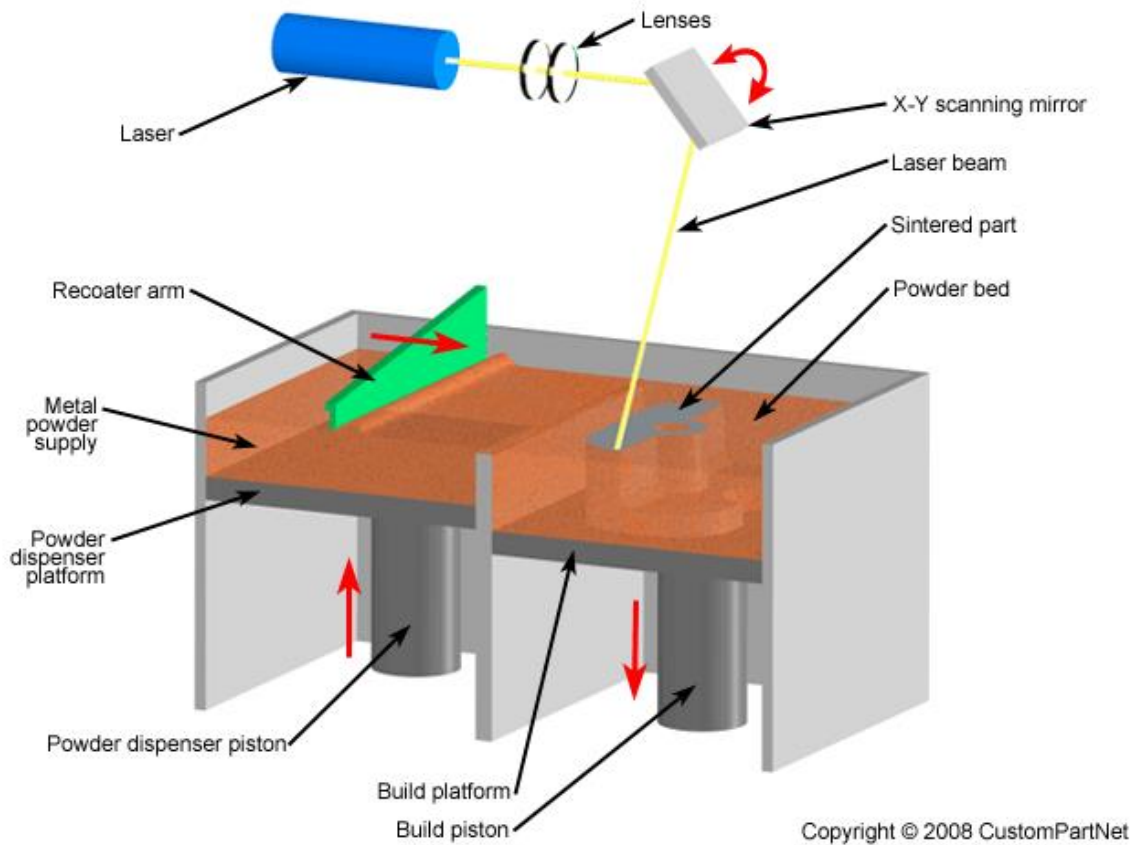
Direct Metal Laser Sintering (DMLS)
